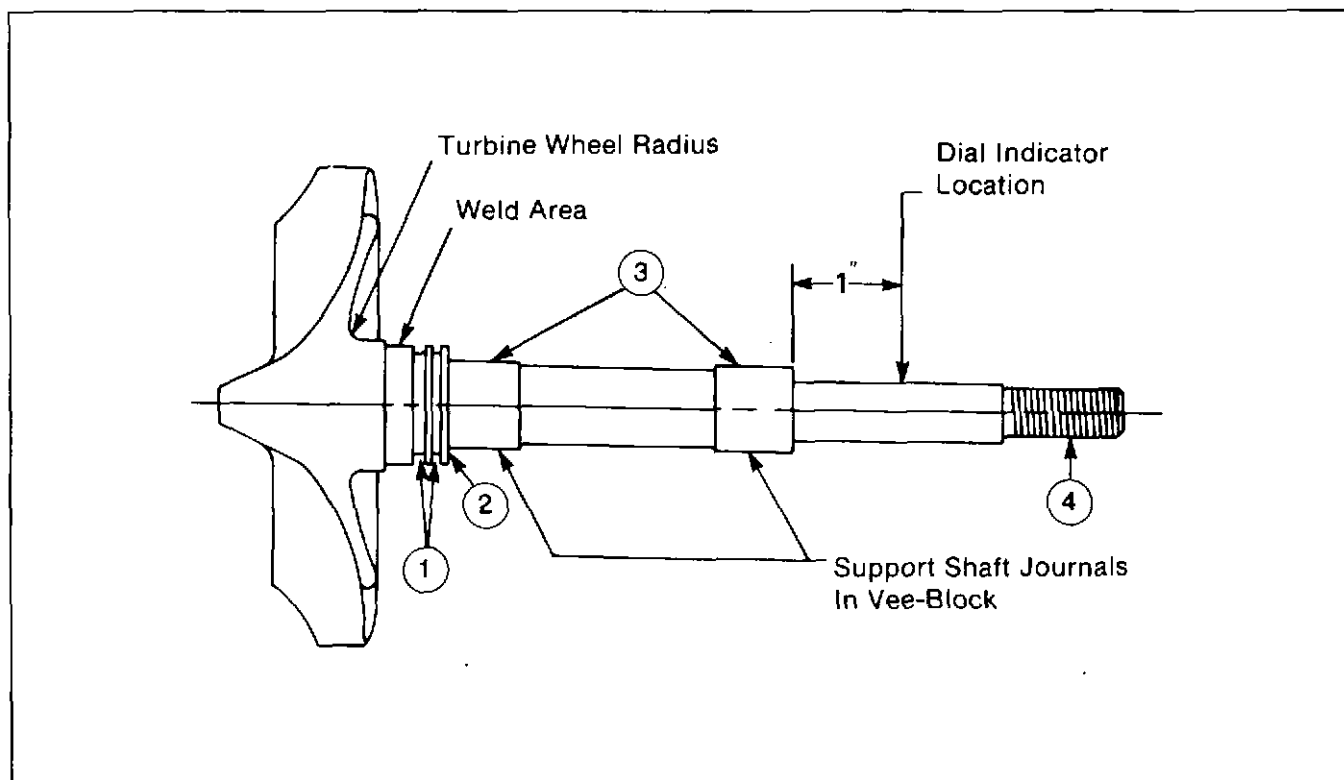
(T465075). Inspect the turbine wheel and shaft
